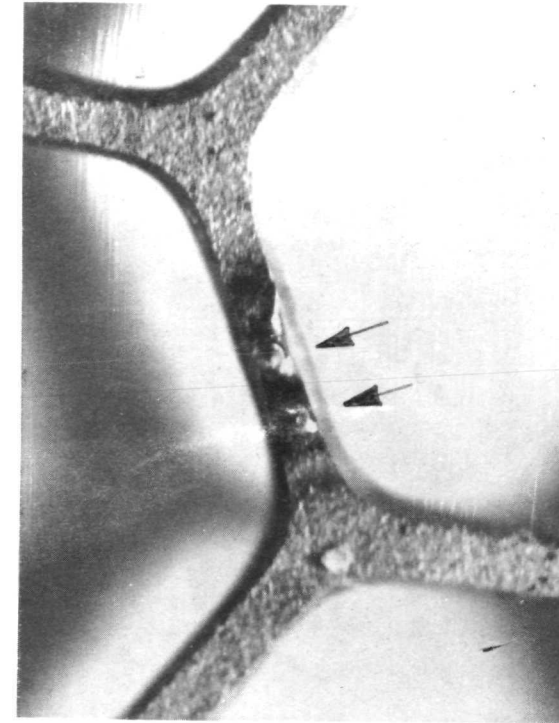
Metal flakes from inside thruster which have shorted the grids and welded in place to form smooth spikes between the grids.
